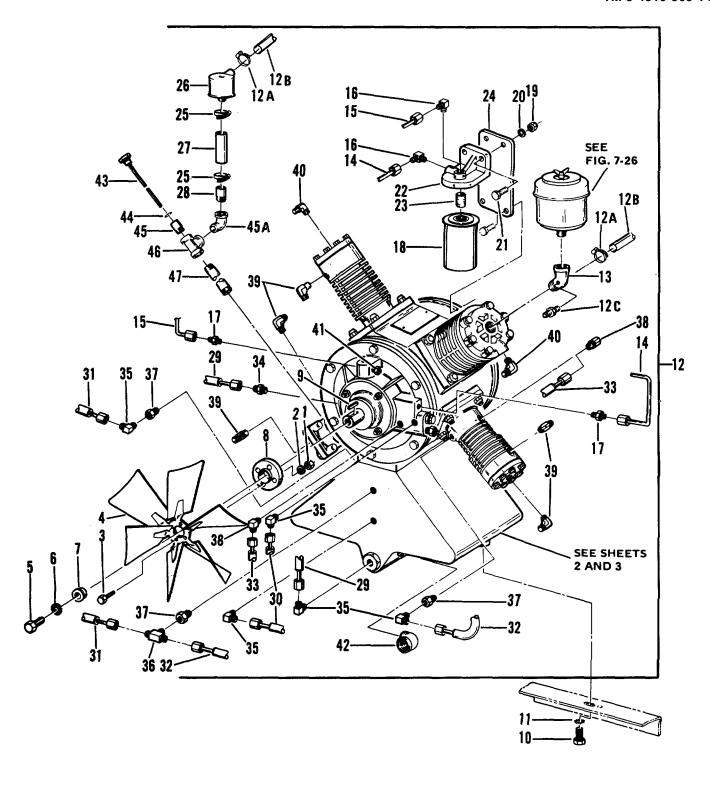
Air compressor assembly (sheet 1 of 3)
